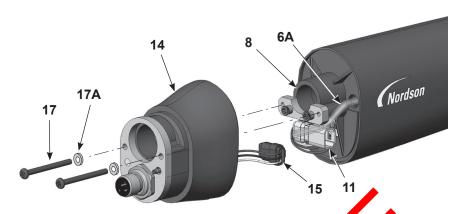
Tube-Mount Gun Disassembly 3 of 5
